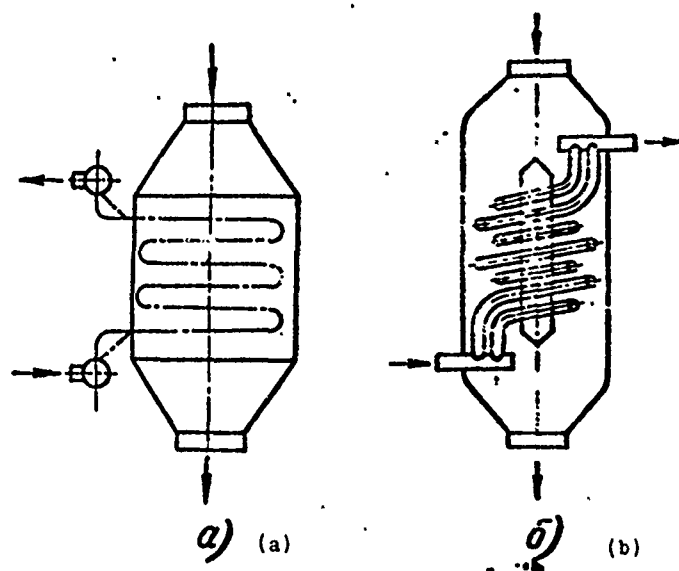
Jacket-and-pipe heat exchangers: a - with flat coils; b - with spiral coils.
